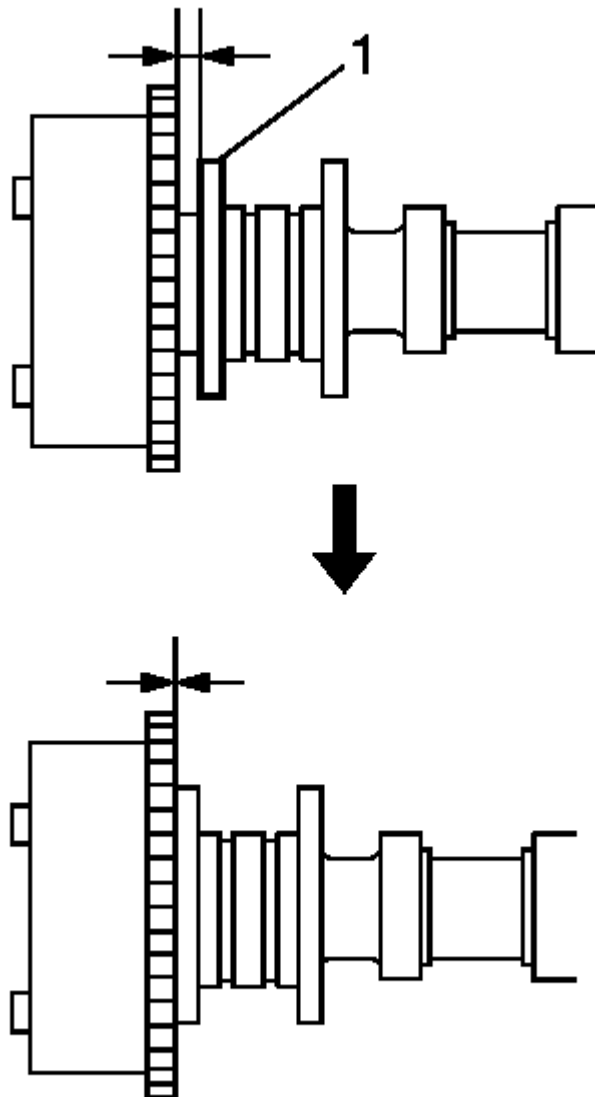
Checking For Clearance Between Gear Flange & Camshaft
